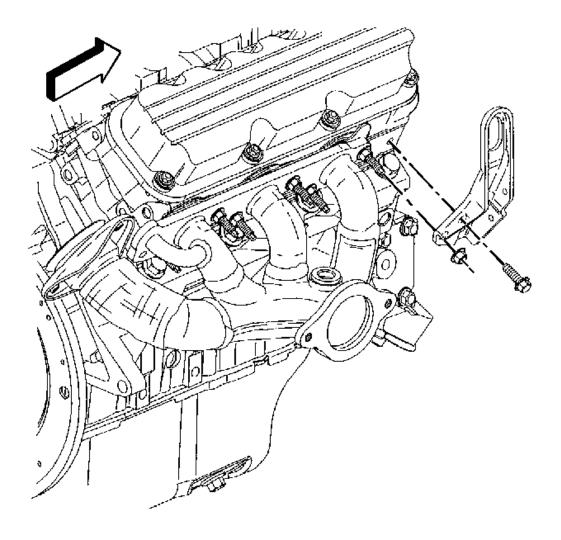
Identifying Right Engine Lift Hook Bracket Courtesy of GENERAL MOTORS CORP.
